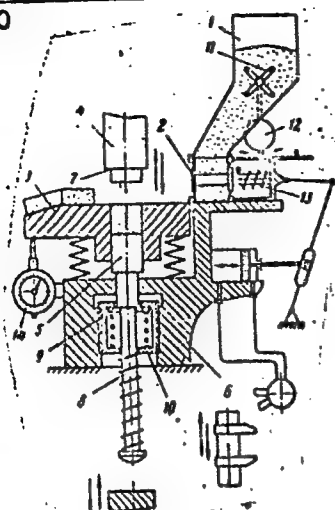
1 - container; 2 - powder-feeding case; 3 - mold; 4 - upper piston; 5 - lower piston; 6 - body; 7 - shoulders; 8 - shaft; 9 - washer; 10 - cup; 11 - stirrer; 12 - pendulum drive; 13 - electric vibrator; 14 - dial indicator
